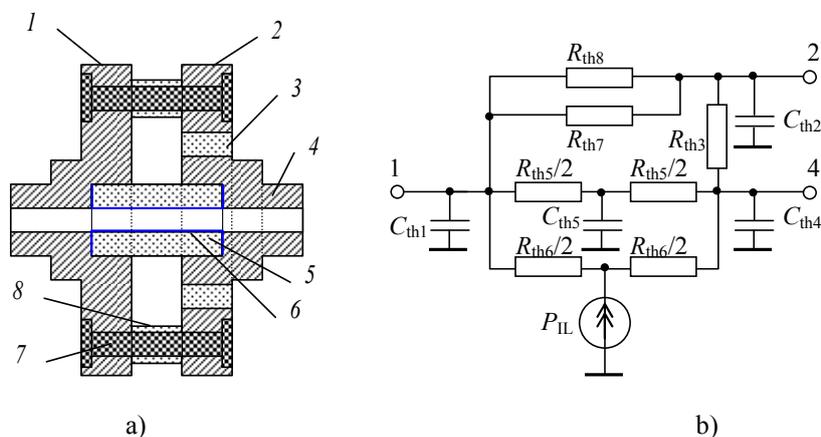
a) - Insulating line cross-section; b) - Dual electrical scheme of insulating line.
